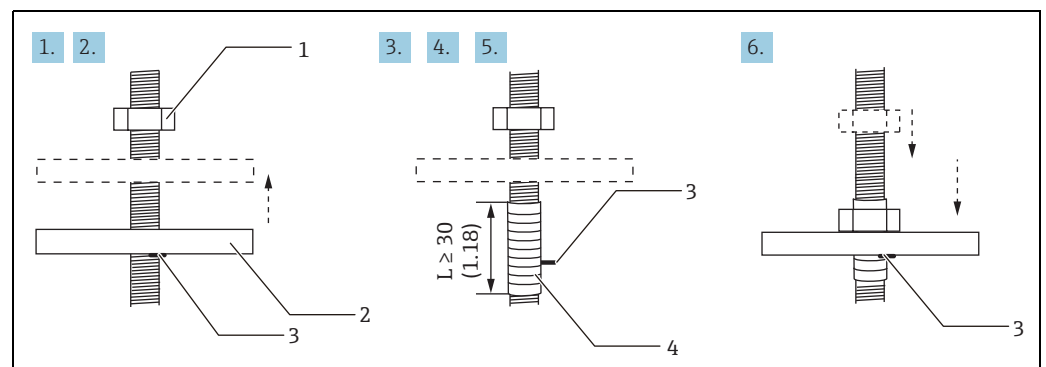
Wrapping Sealing Tape, Unit of measurement: mm (in)
